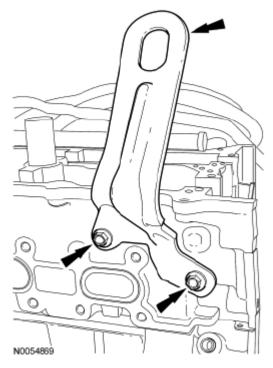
Locating Engine Lifting Eye With Bolts Courtesy of FORD MOTOR CO.
